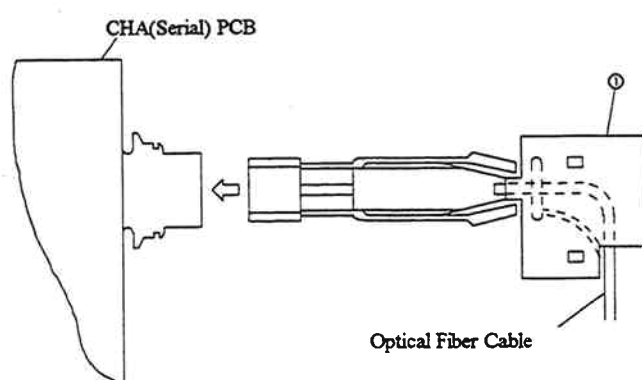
Connection of Optical Fiber Cable
